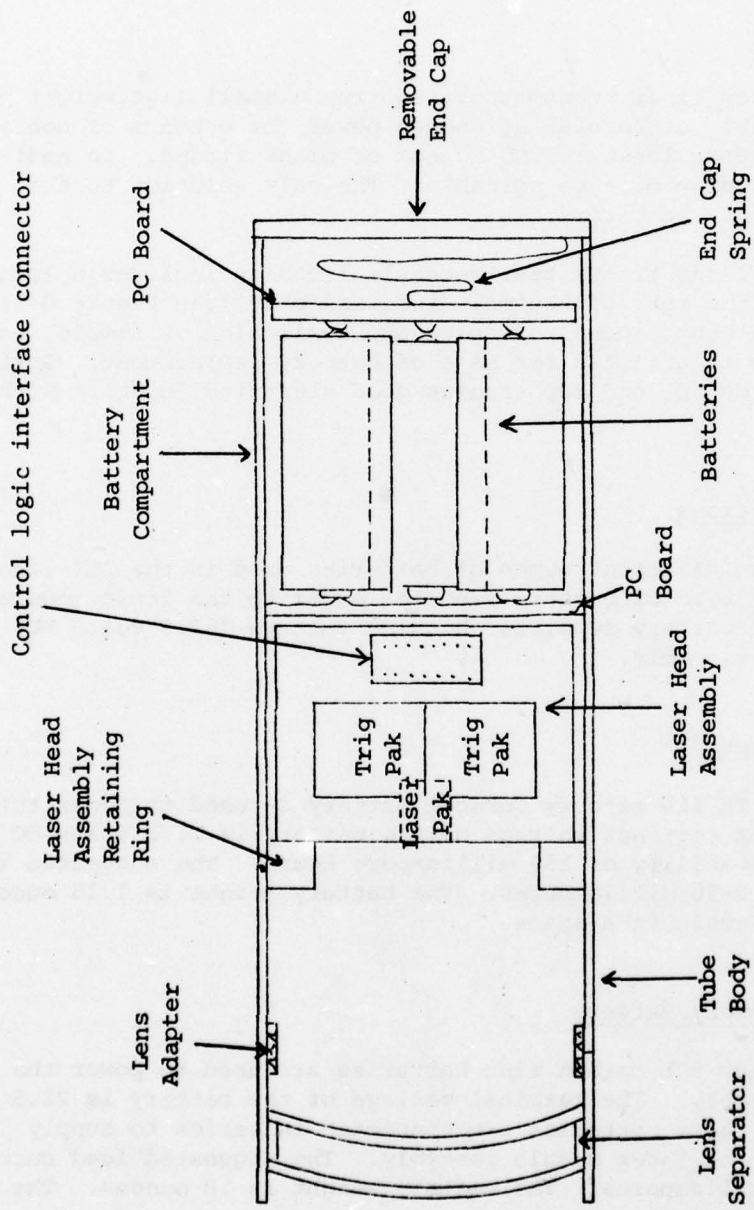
Mechanical cutaway side view laser transmitter (LES system).
